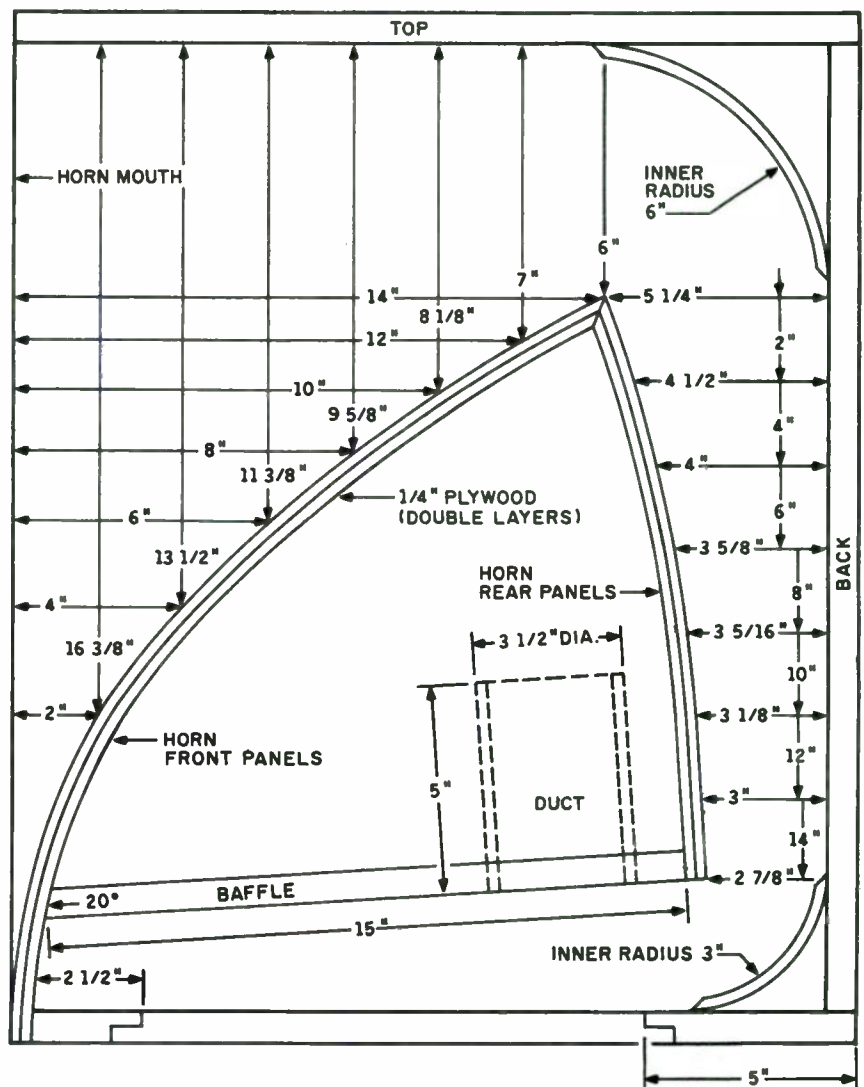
Cabinet side view—the Snail shape is clear. Front horn-panel intersect points are measured from panel edge at mouth opening and inside of top panel. Rear horn-panel points are measured from the intersection of front and rear panels and inside of the cabinet back. Note that baffle's leading edge (intersection with front horn panels) is cut at a 20° angle.
